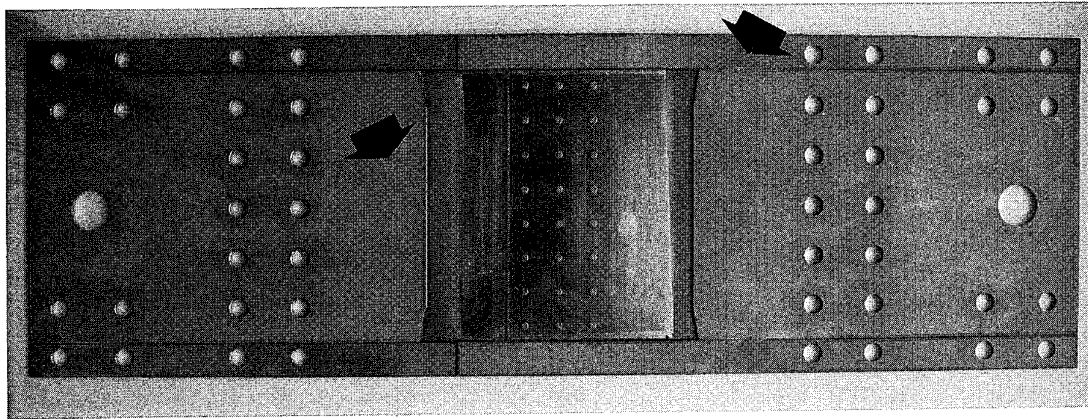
Optimum MSD test specimen concept - full length bonded side straps and full width bonded doublers - implemented here as 25.4 cm (10 in) wide specimen for proof-of-concept testing.
